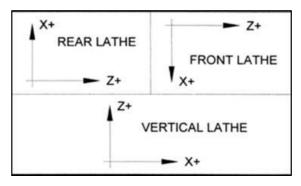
Typical machine axes of a CNC lathe (turning center)
